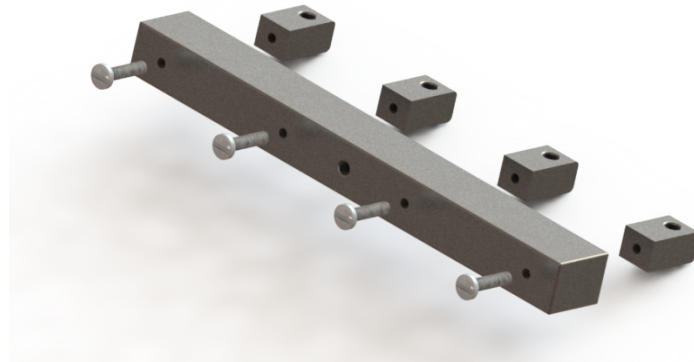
Exploded view of the cable bar used to transfer actuation tension from the single cable that extends to the forearm of the system to the individual fingers.
